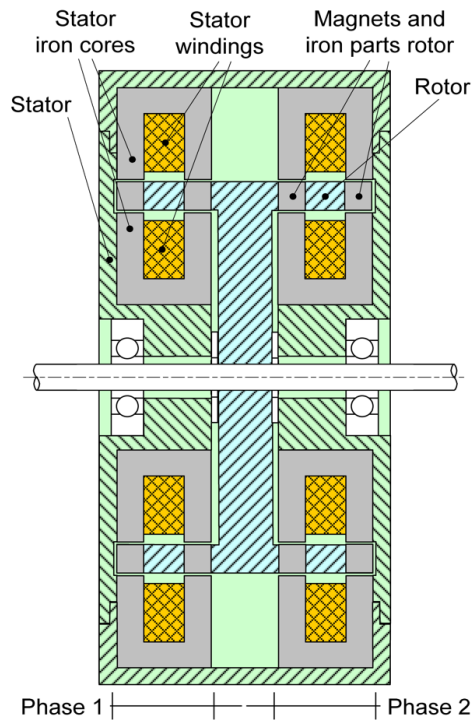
Schematic cross sectional view of an industrially developed Transversal-Flux-Machine with double-stator
